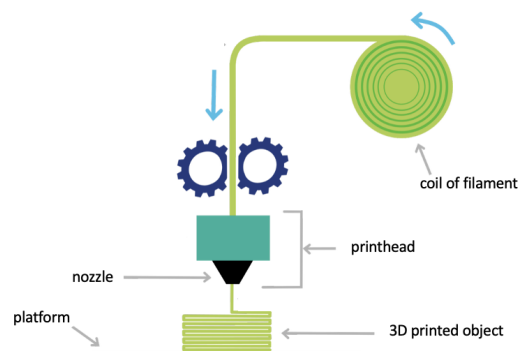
Schematic of a fused deposition modeling 3D printer [53]
